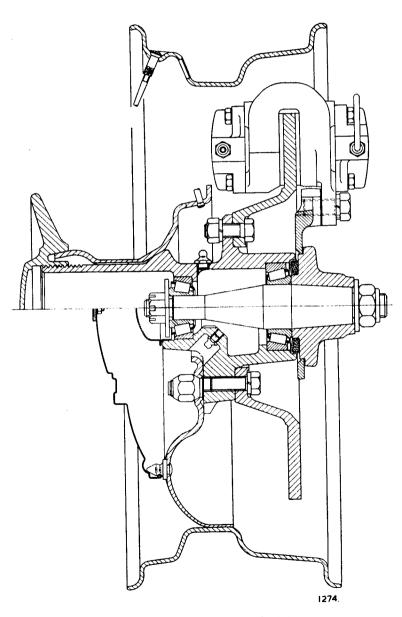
Sectioned plan view of the disc brake hub arrangement. The upper half of the illustration shows a wire spoke wheel hub; the lower half shows a disc wheel hub.
